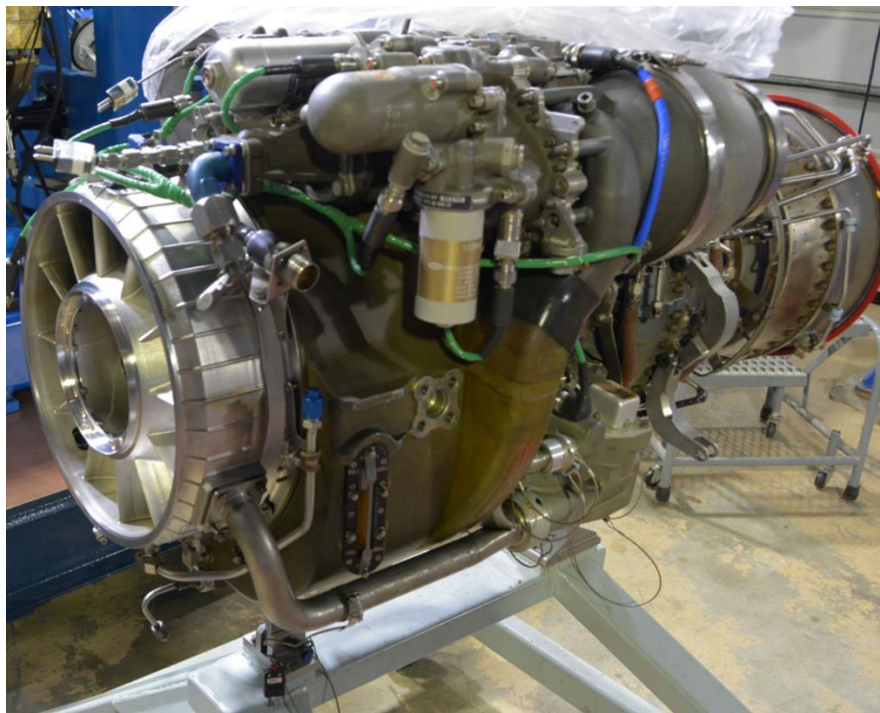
Final Assembly Fit Check – 17A206-230G01 Additive Swirl Frame Installed on U.S. Navy T700-401C Engine
